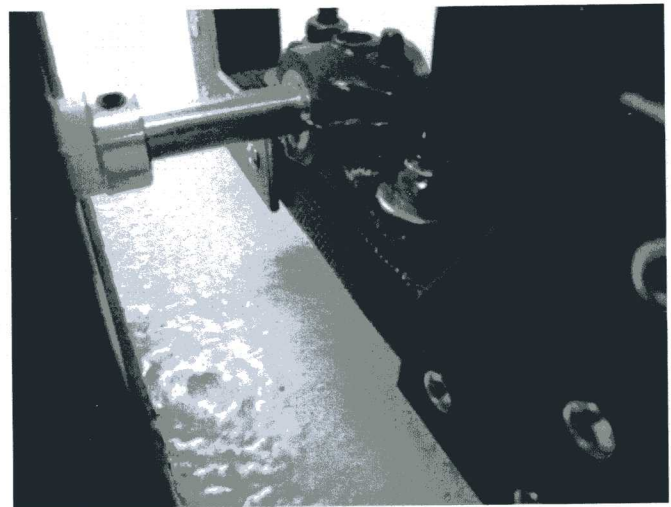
Bulging Carbon Fiber Tube at Drive Interface of Bearing Mount
